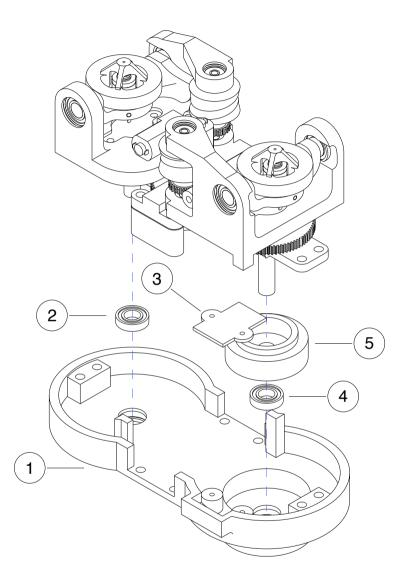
Exploded view of the jaw mechanism coupled with the underside cover and the encoder.
